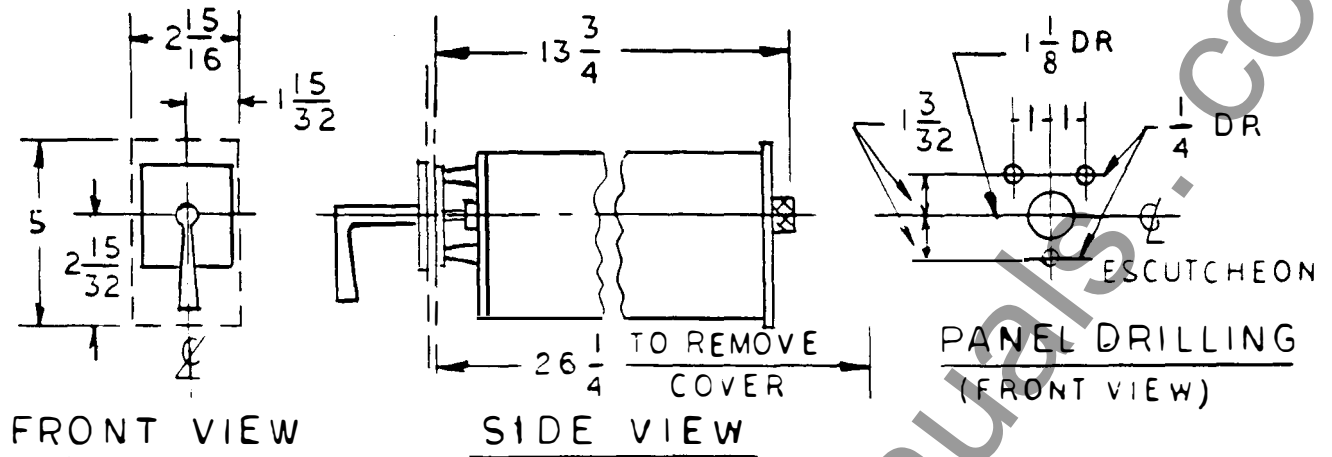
(0273A9068) Outline, Panel-Drilling Dimensions and Electrical Connections Diagram for External AC Milliammeter Auxiliary Transformer
